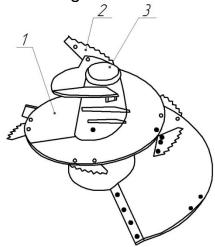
the blades on the auger 1 - screw, 2 - a knife, 3 - the screw shaft.
